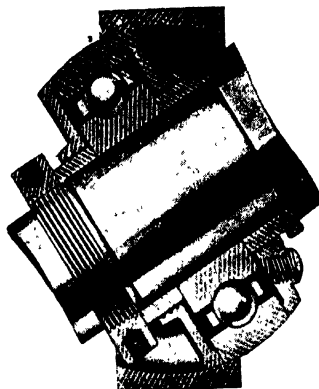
SELF-ALIGNING BALL JOURNAL BEARING SHOWING RANGE OF MOVEMENT. [Hoffmann.]
